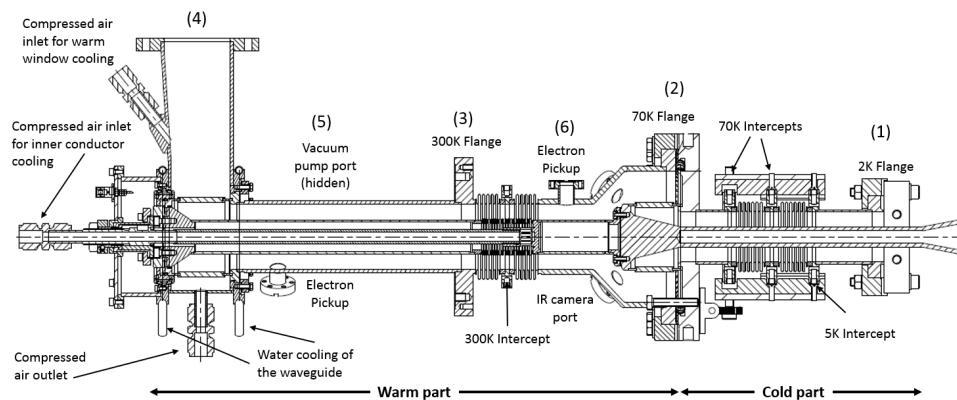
The assembly drawing of the full coupler showing intercepts, ports and the cold and warm parts.
